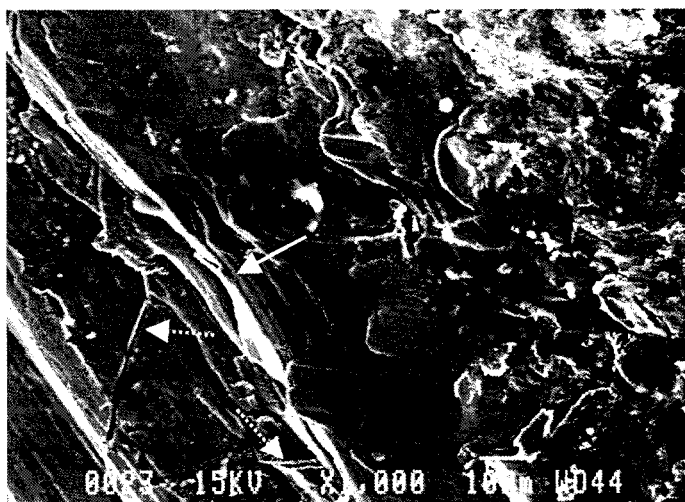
Intensive friction observed on the torsional fatigue fracture surface close to the notch tip in specimen N2T4. The solid arrow shows the notch tip, and the dotted arrows show the cracks propagating on the plane perpendicular to the main crack front.
